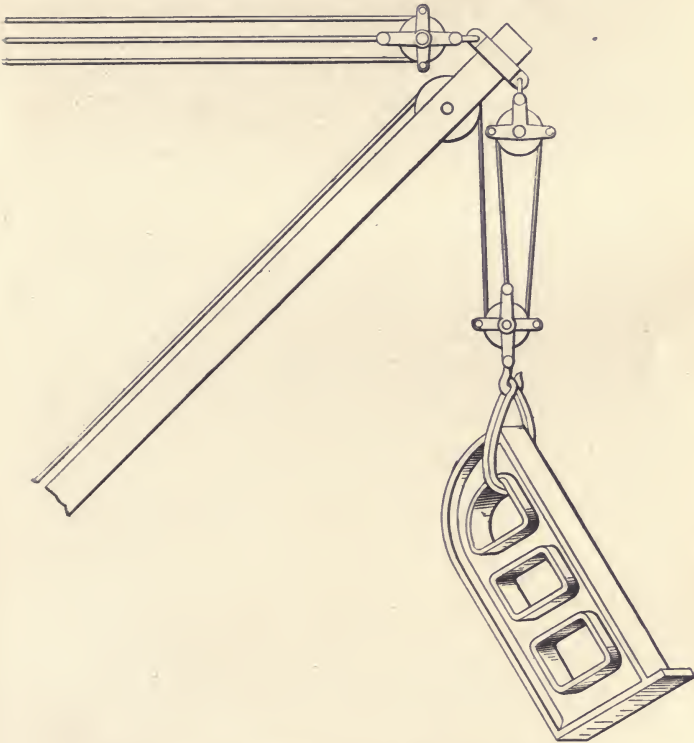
HANDLING LARGE CASTINGS WRONGLY.
